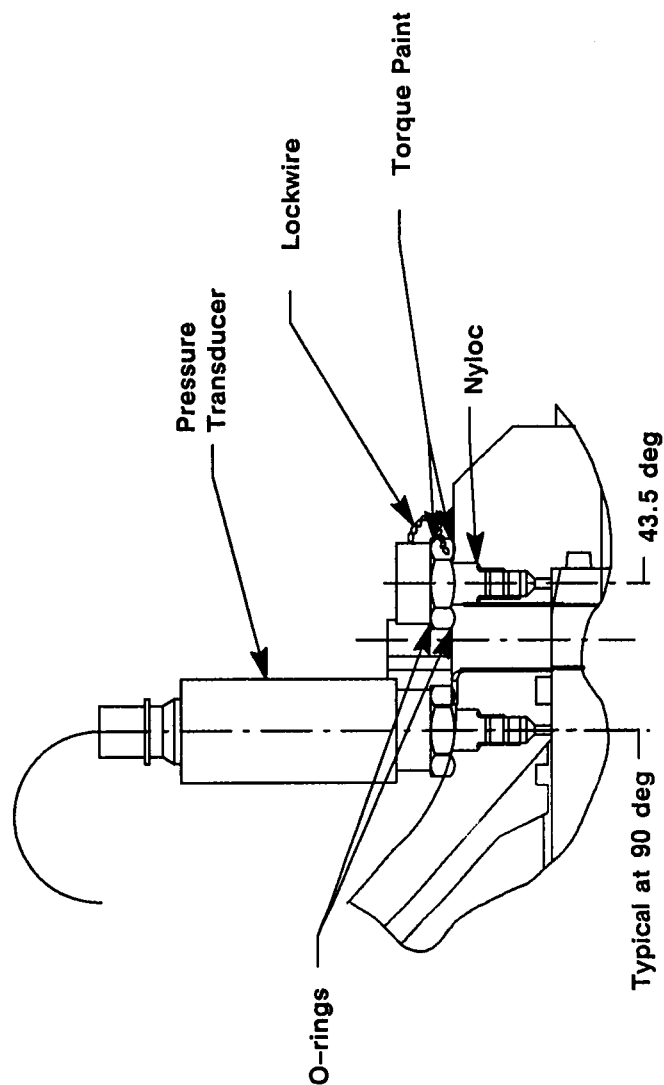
Case-to-Nozzle Joint Pressure Transducer
